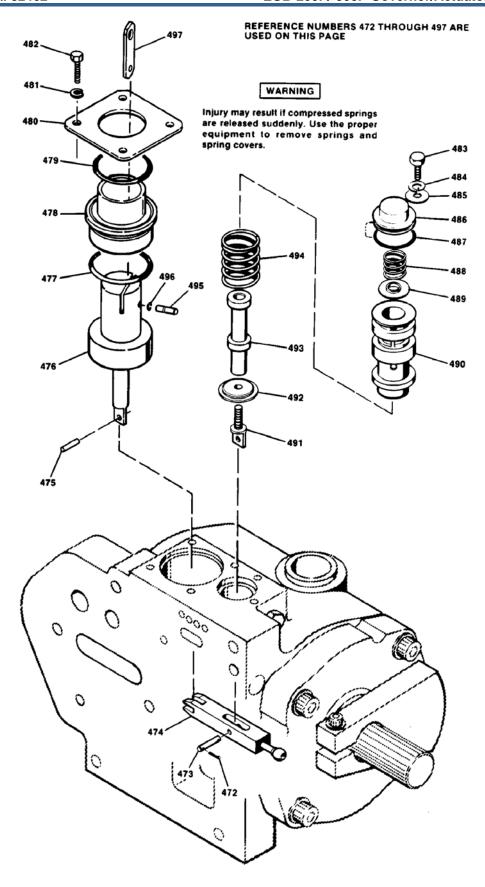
Parts for the EGB-200P Governor/Actuator
